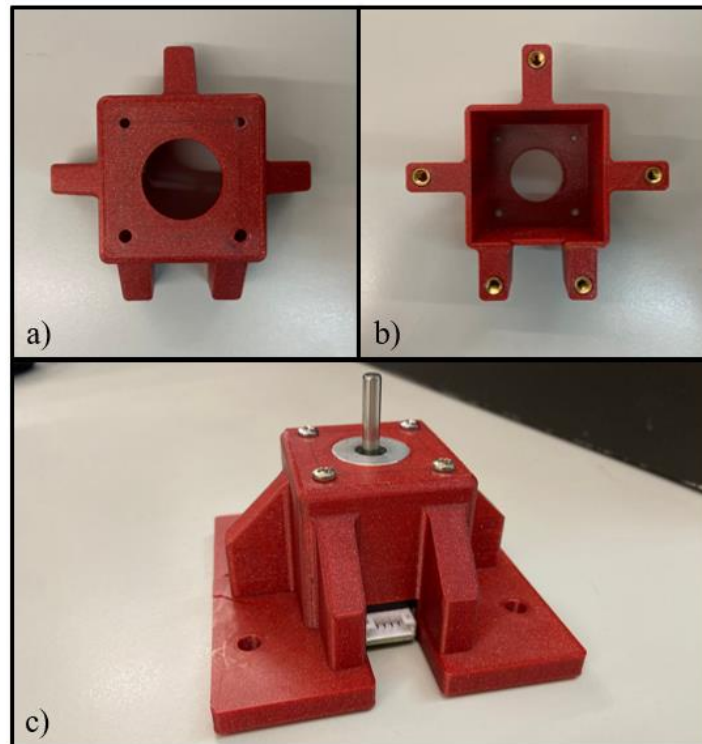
Stepper motor casing: (a) top view, (b) bottom view, (c) stepper motor base and casing assembled around the stepper motor.
